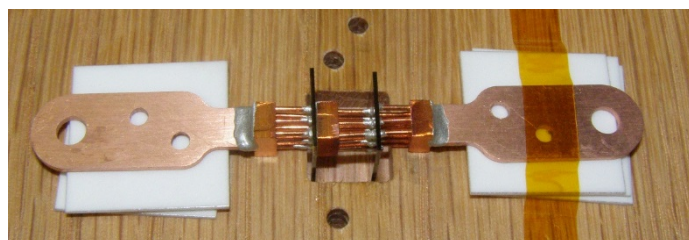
Solder fixture used to align the copper leads to the completed stacked structure and attach.
